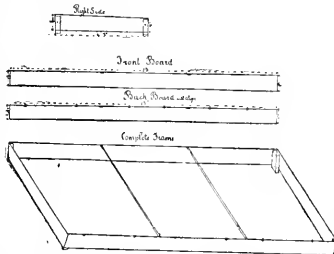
FRAME USED IN THE "FRENCH" GARDEN. Dimensions: 13 feet x 4 feet 3 inches; depth in front 8 inches, at back 9 inches.
